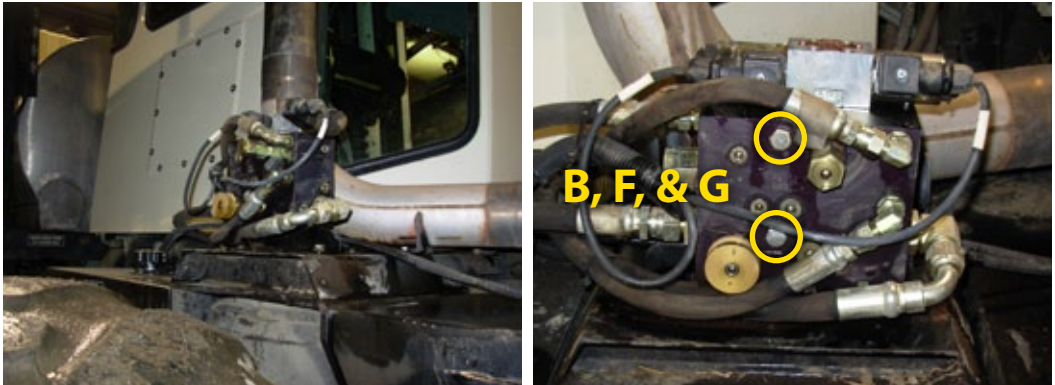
Install Mounting Bracket for FieldPilot Valve
